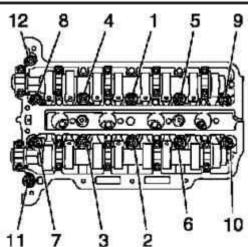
The order of tightening the bolts fastening the cylinder head
